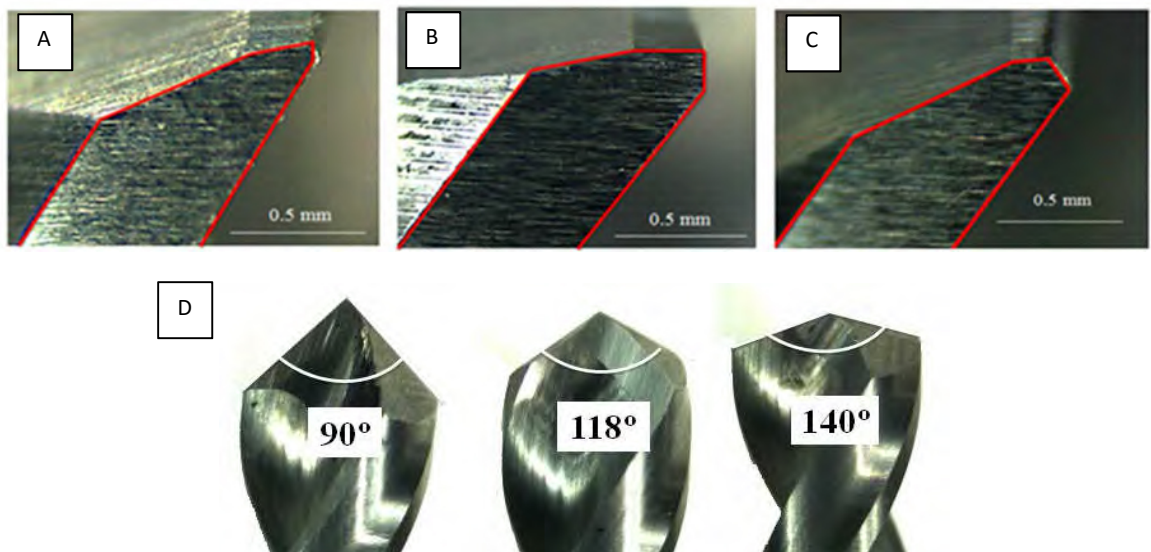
Edge geometries of drill bits tested; A new tool, B honed edge tool, and C flank worn tool. Under each tool type, three point angles (90°, 118°, and 140°) were chosen as shown in D for the new tool case.
